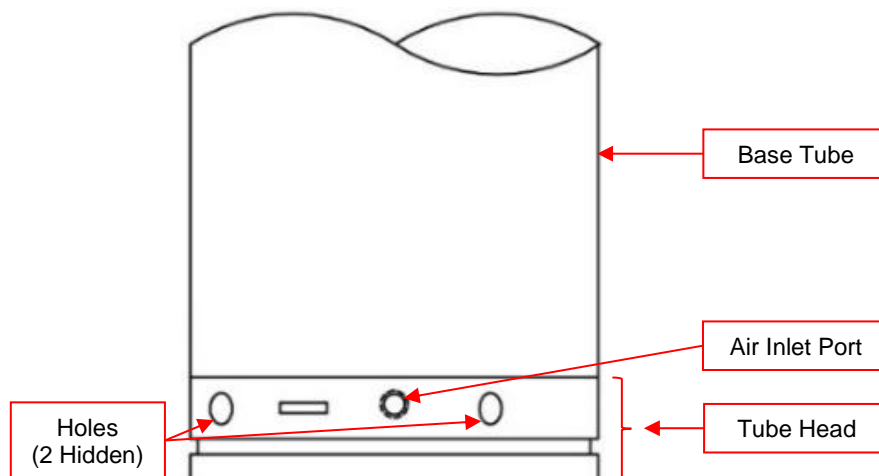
Bottom of Rotatable Super-Heavy-Duty Mast (P/N: 909426 Shown)
